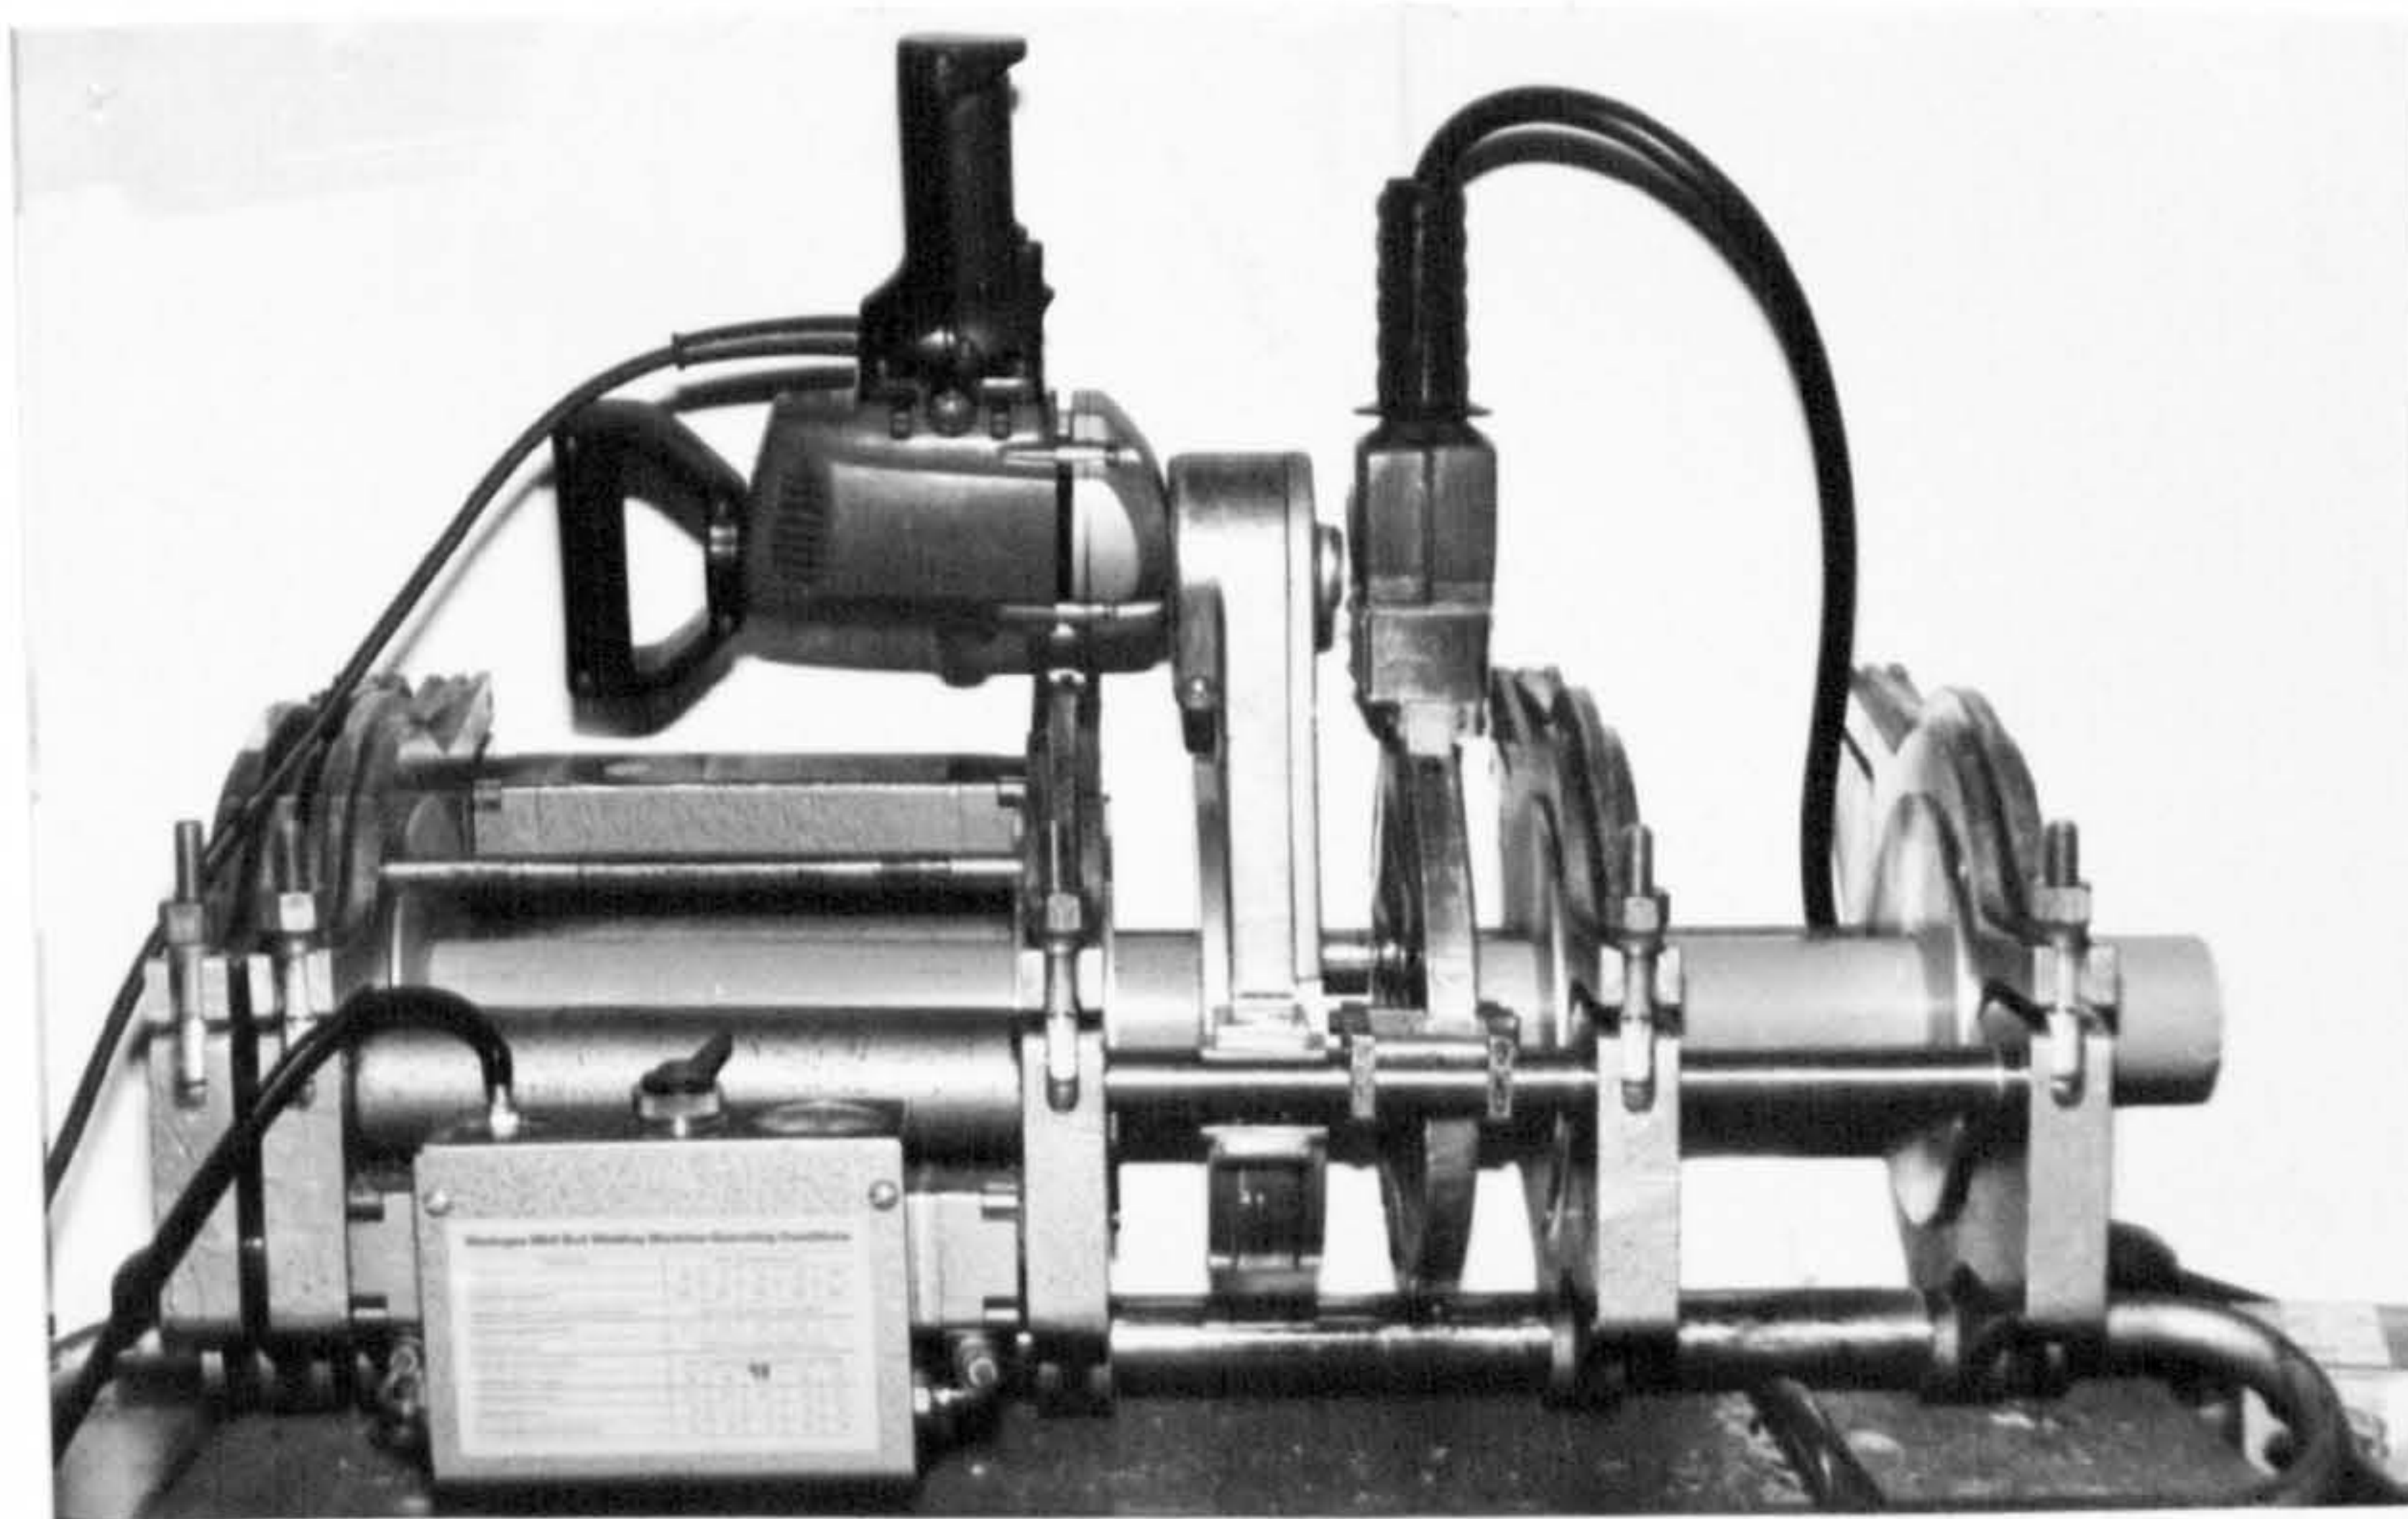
Haxey Mk II Butt Welding Machine.
